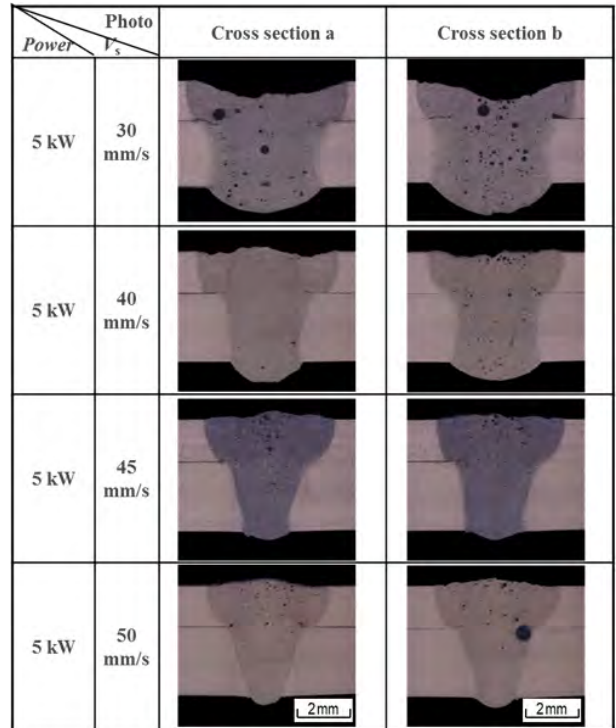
Cross-sectional images of AA6014-AA6451 laser lap dissimilar welding by change welding speed at 5 kW laser power
